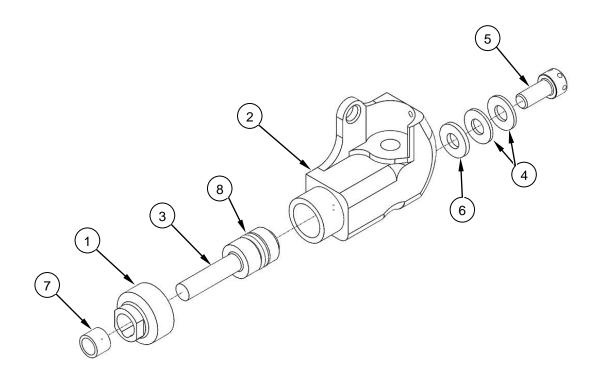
Slave Cylinder Assembly P/N 232-169-01
